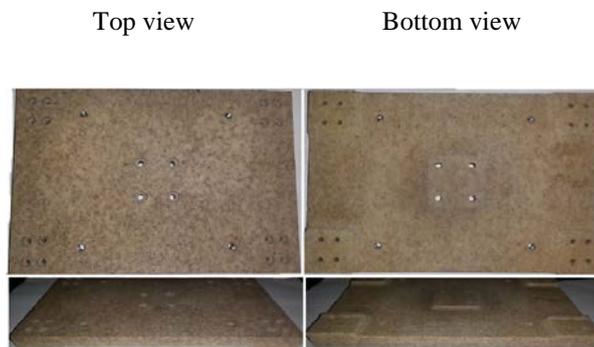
Sample of CNC milling moving part (table unit) made by using EFB fiber filled epoxy composite material
